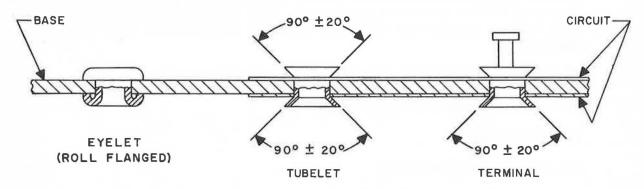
Eyelet, Tubelet and Terminal on a Board
